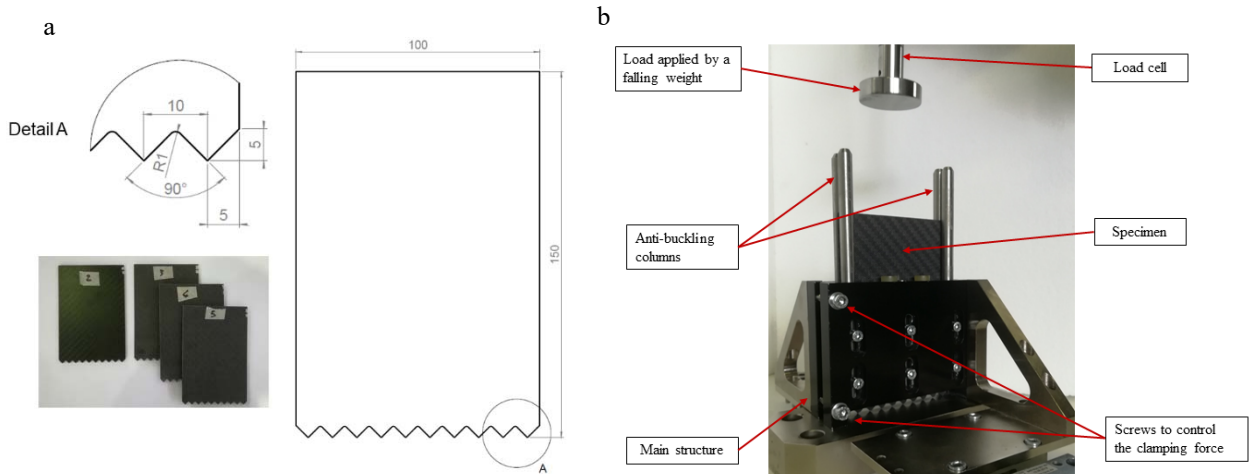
a) Picture and drawing of the carbon fiber/epoxy specimens used for this research, with dimensions in mm. b) Fixture for impact compression crash testing on composite flat plates.
